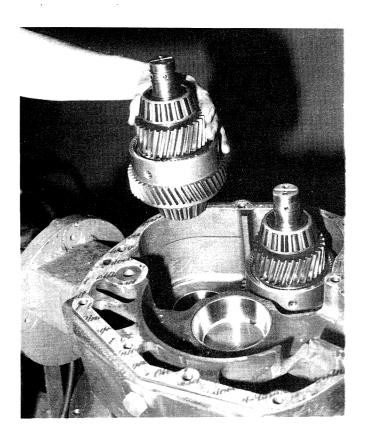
Removing or Installing the Reverse Clutch Assembly.
